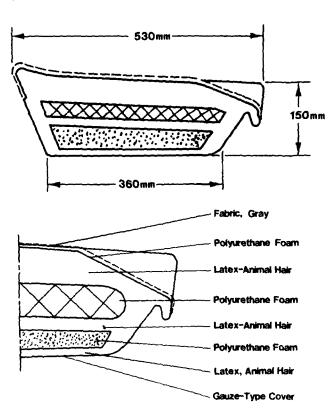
German Seat Cushion Cross-section and Dimensions (in cm)
